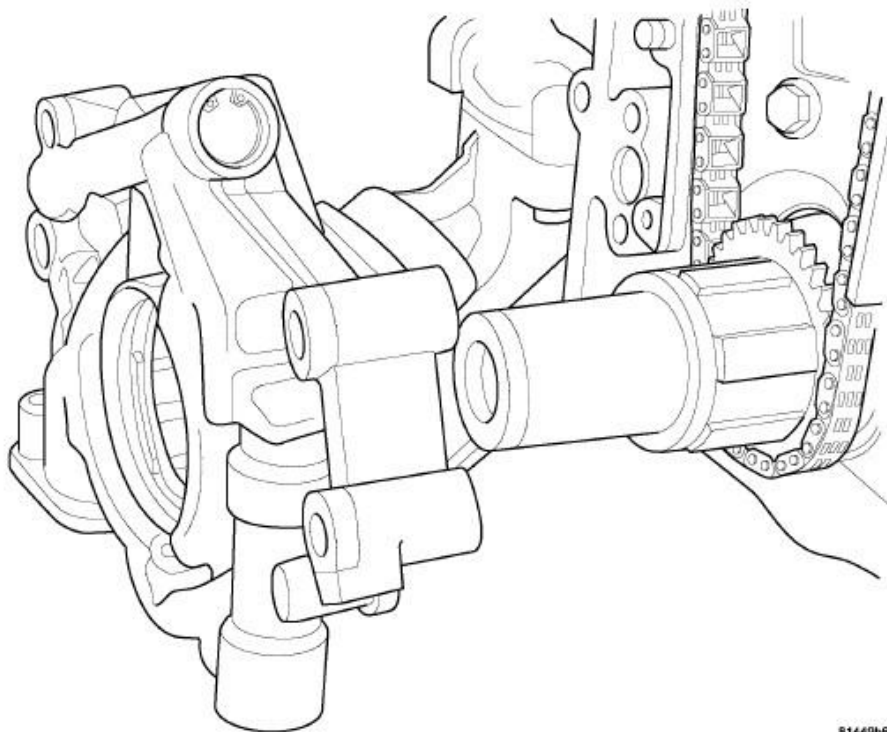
OIL PUMP REMOVAL/INSTALLATION
